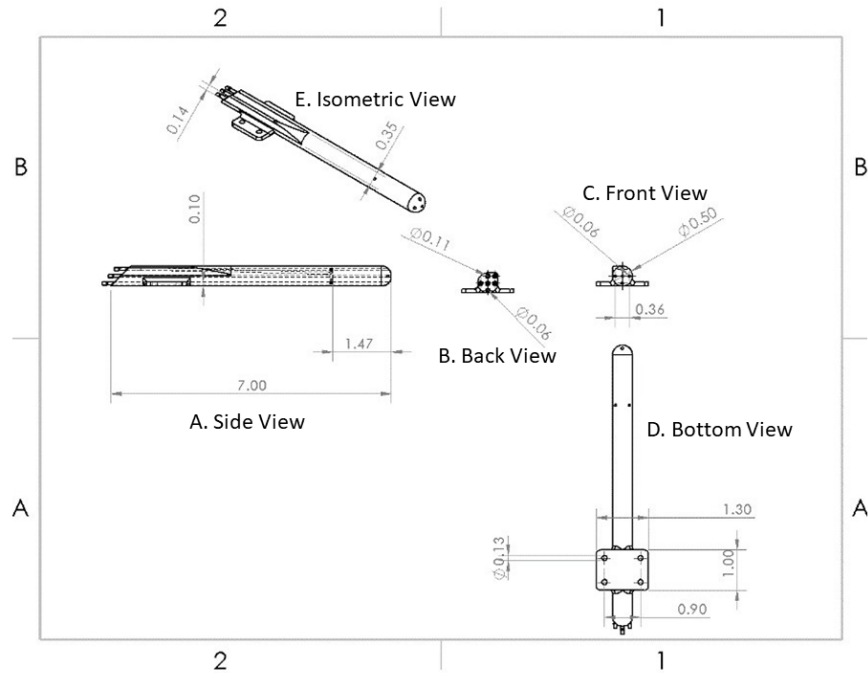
Probe Dimensions: A. Side View, B. Back View, C. Front View, D. Bottom View, E. Isometric View
